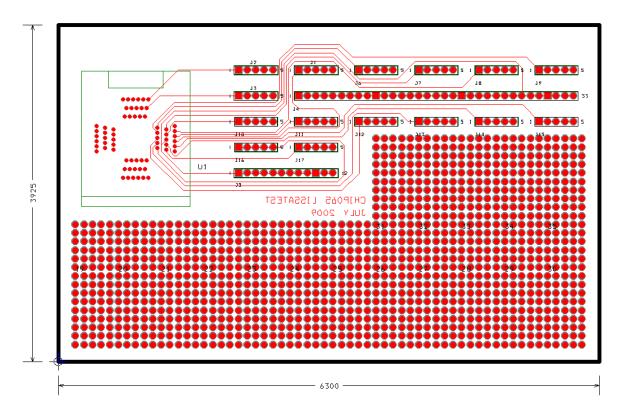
Test bench layout designed with OrCAD Layout. The design has been sent to CNC fabrication at *Taller Mecànic ETSEIB*.
